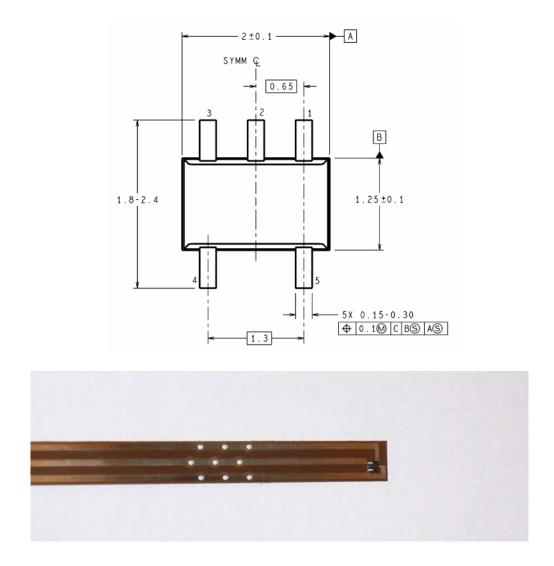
One flexible PCB strip (substrate: Kapton) with the thermal sensor
